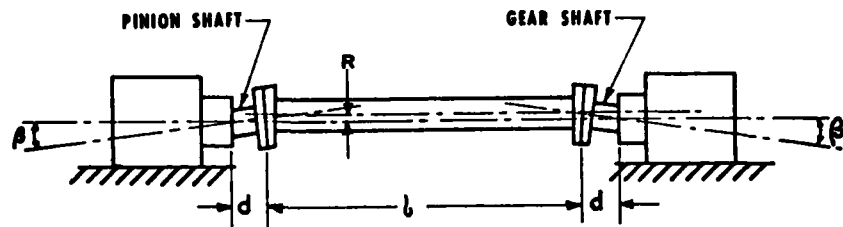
CYLINDRICAL WHIRL ALLOWED BY BEARING OR SPLINE CLEARANCE AND BENDING FLEXIBILITY OF COUPLINGS
